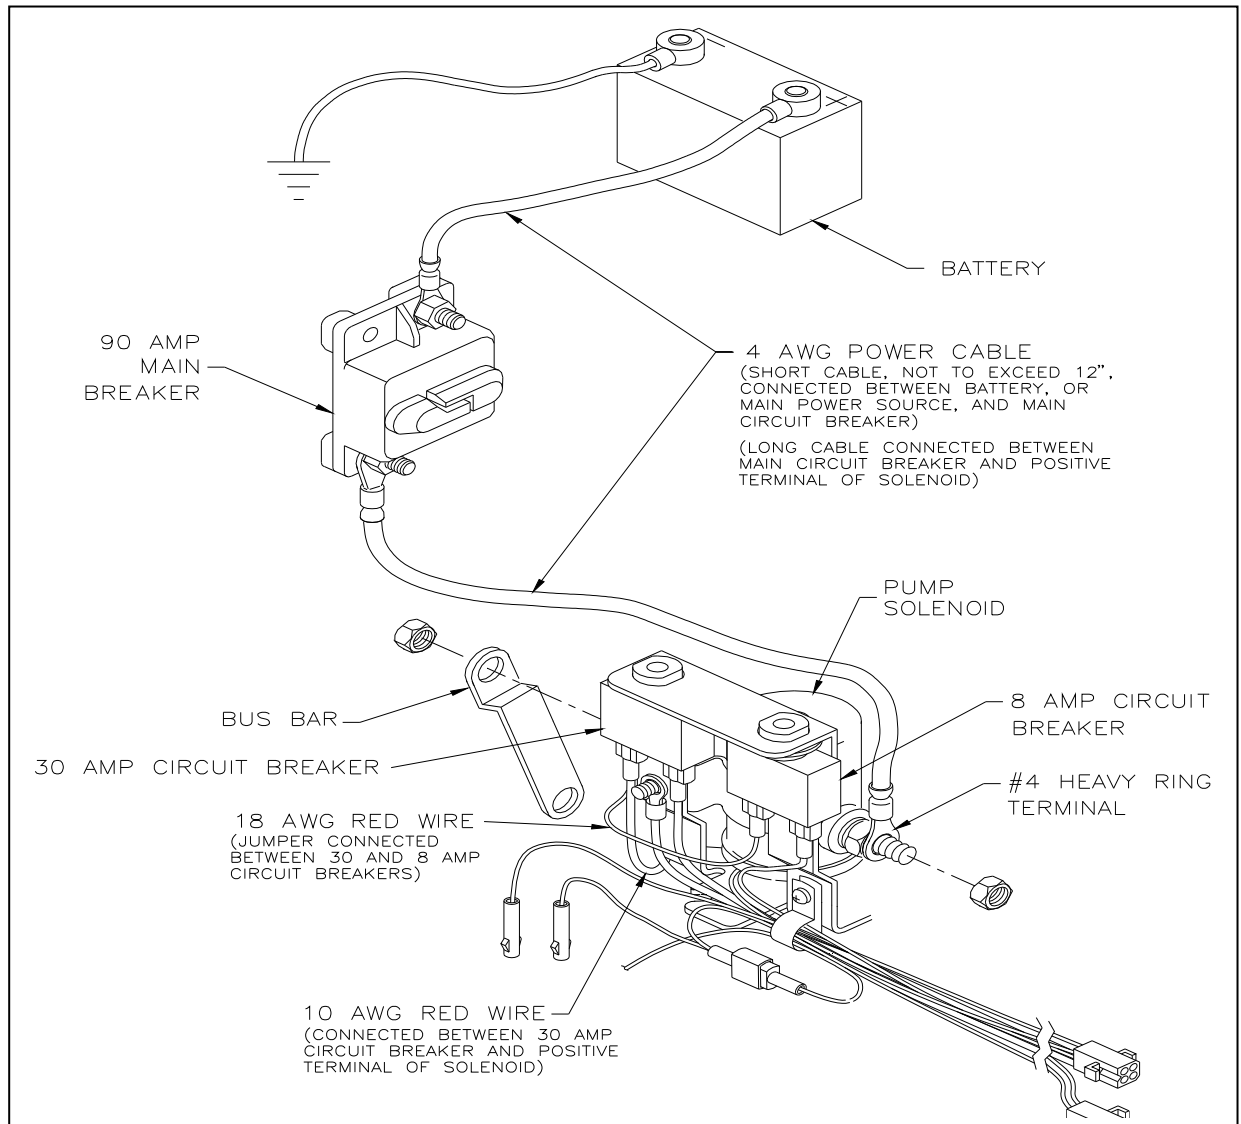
ELECTRICAL INSTALLATION DIAGRAM
